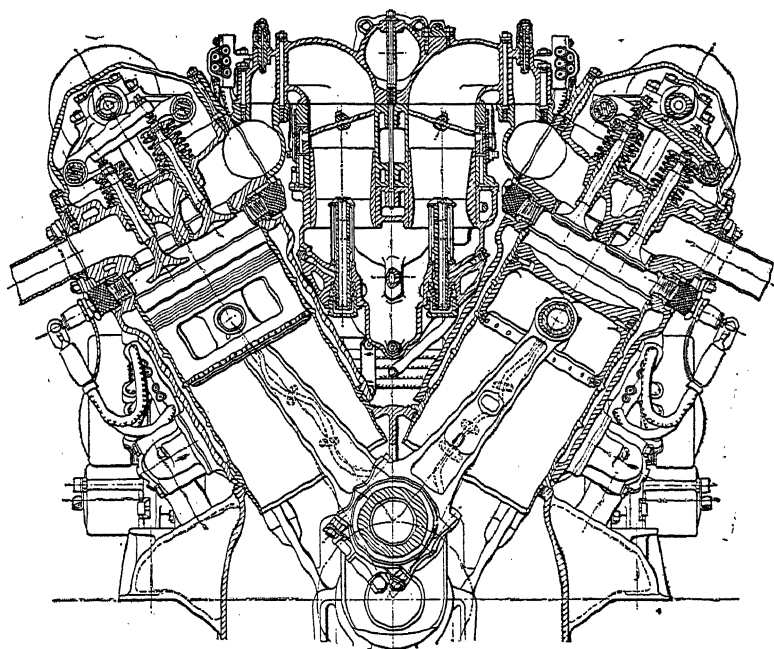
Cylinders, pistons and connecting rods of Rolls Royce F-type engine.
